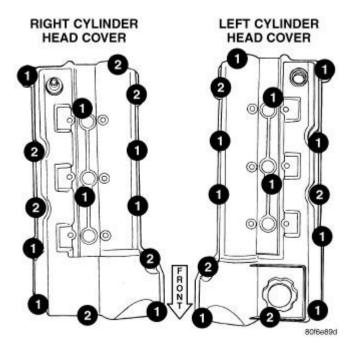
Cylinder Head Cover Fasteners Courtesy of CHRYSLER LLC
